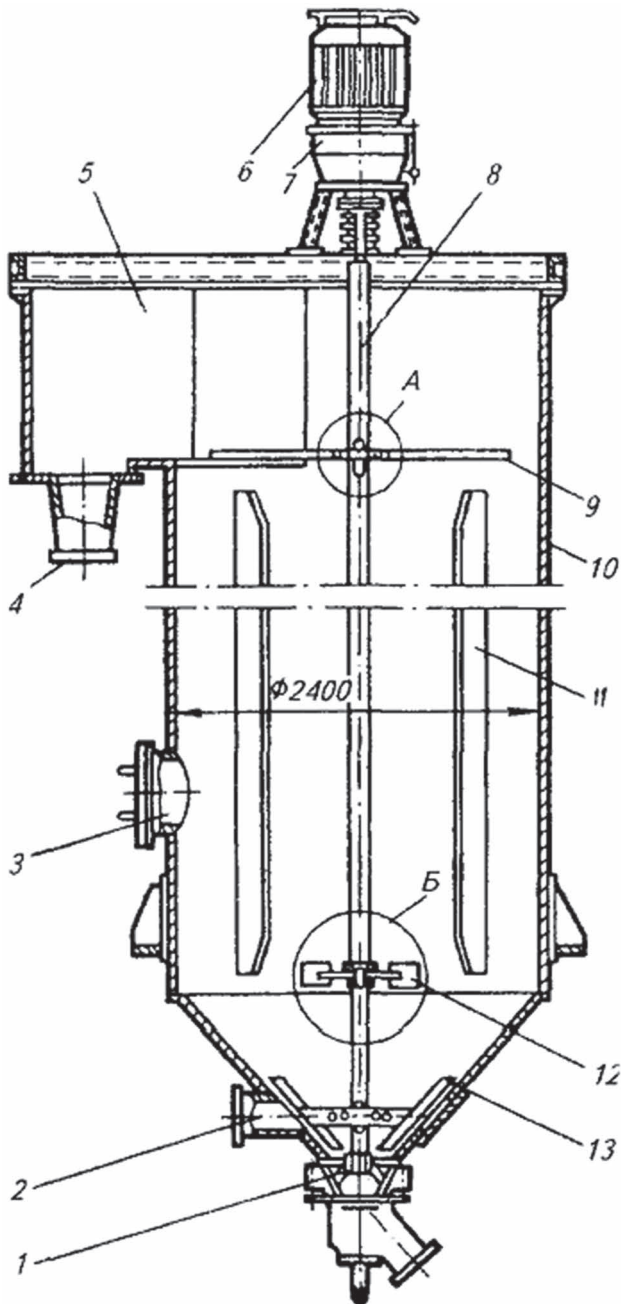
Scheme of predeterminer PR-3: (1) bearing; (2) inlet fitting; (3) access hatch; (4) outlet; (5) foam box; (6) electric motor; (7) gearbox; (8) vertical shaft; (9, 12, 13) mixers; (10) the case; (11) counterfeet.
